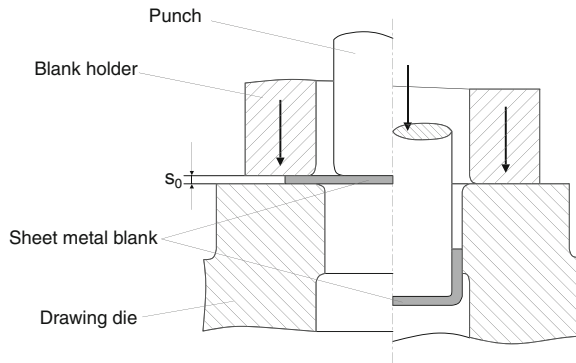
Deep drawing of a cup from a *flat circular* sheet
